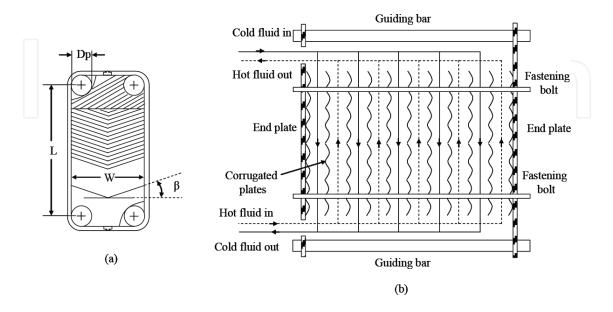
Plate and frame heat exchanger: (a) geometry of a chevron plate and (b) overall exchanger assembly.
